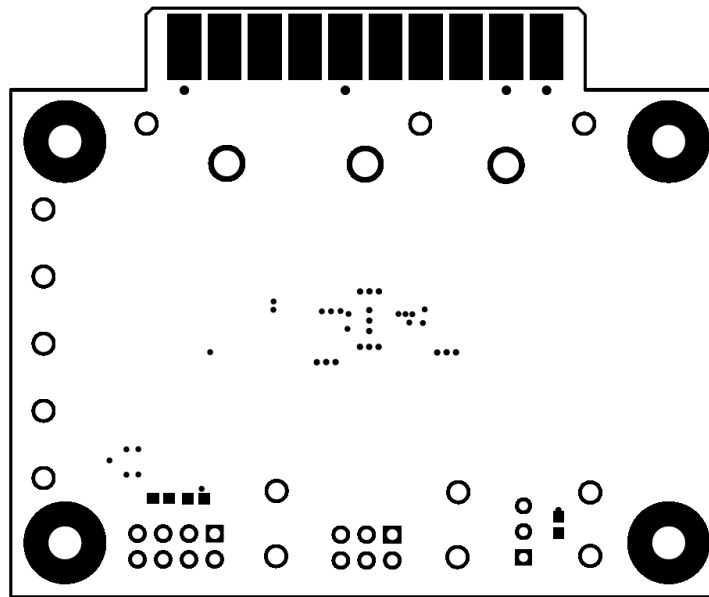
Fixed Output Board Layout - Bottom Soldermask
